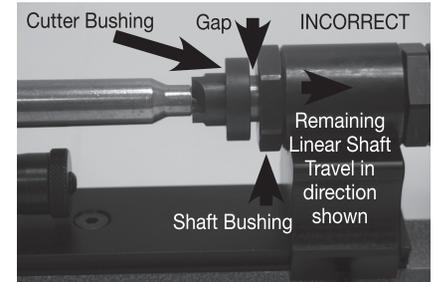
Cutter Bushing NOT in contact with Shaft Bushing
